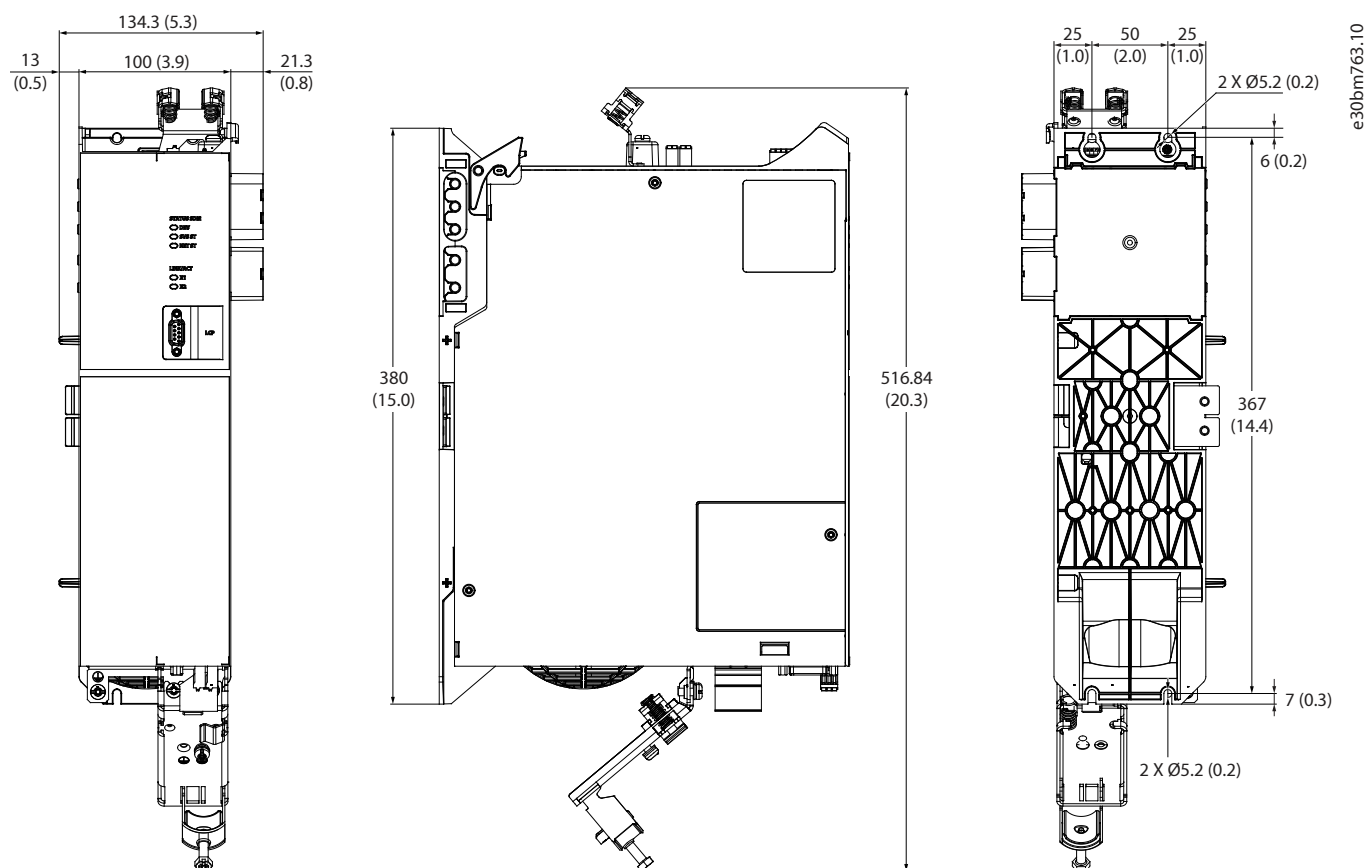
Dimensions of SDM 521 Enclosure Size 2 (FS2)
